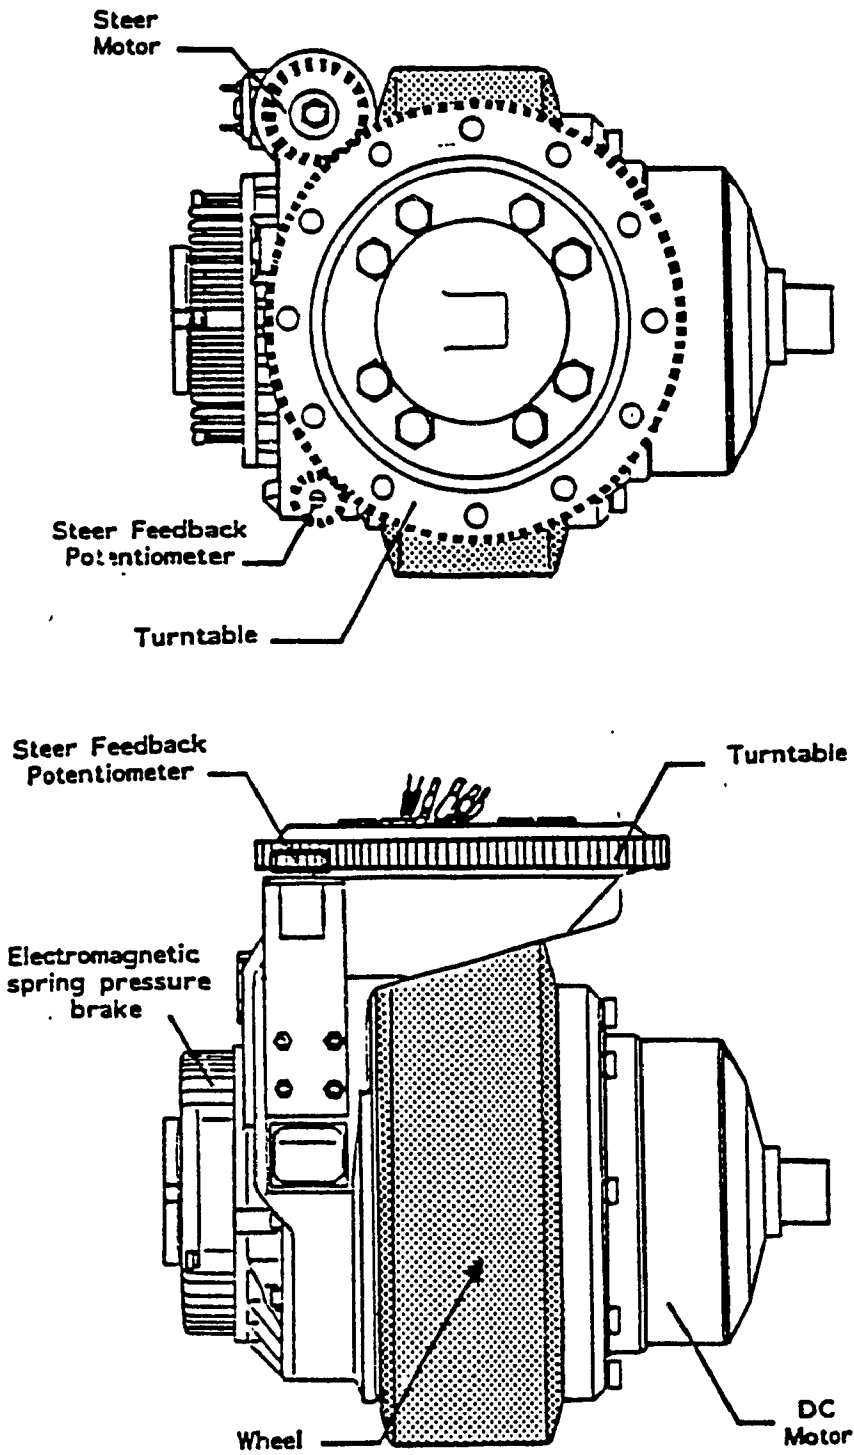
Motor-in-wheel Drive Unit with Steering Arrangement
